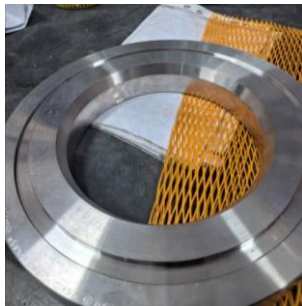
Smallest Tool Available at industry and Reference tool for surface hardening
